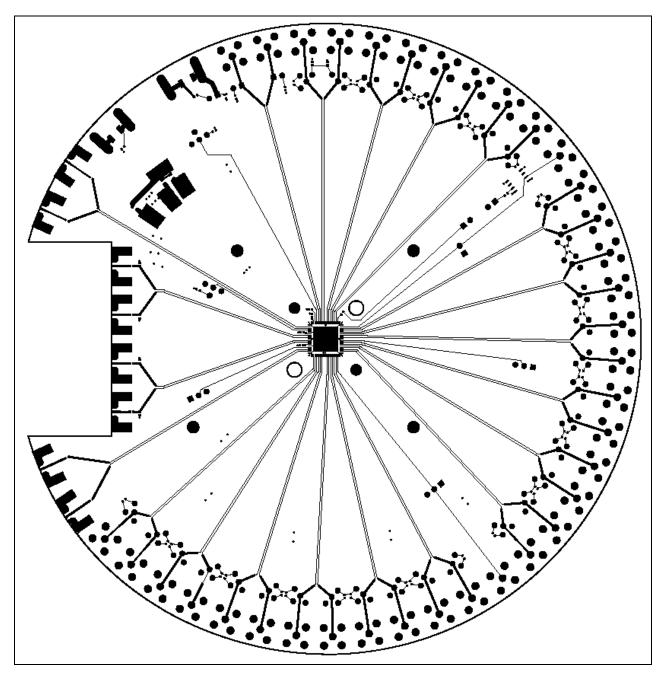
MAX3952 EV Kit PC Board Layout–Component Side
